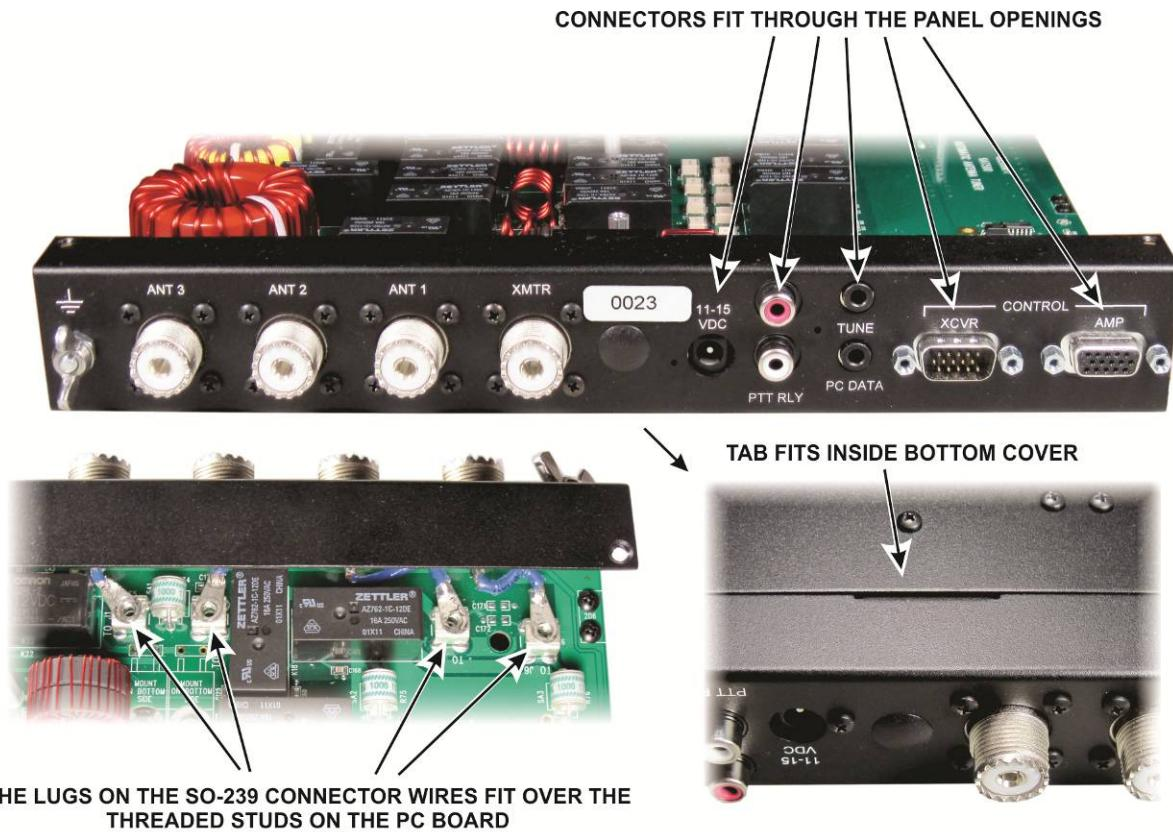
Positioning the Rear Cover on the PC Board and Bottom Cover Assembly.
